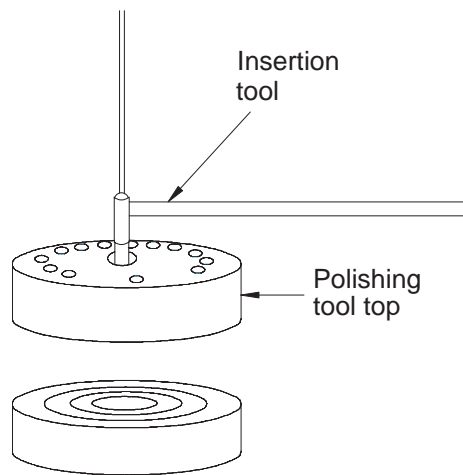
Inserting the Terminus into the Polishing Tool
